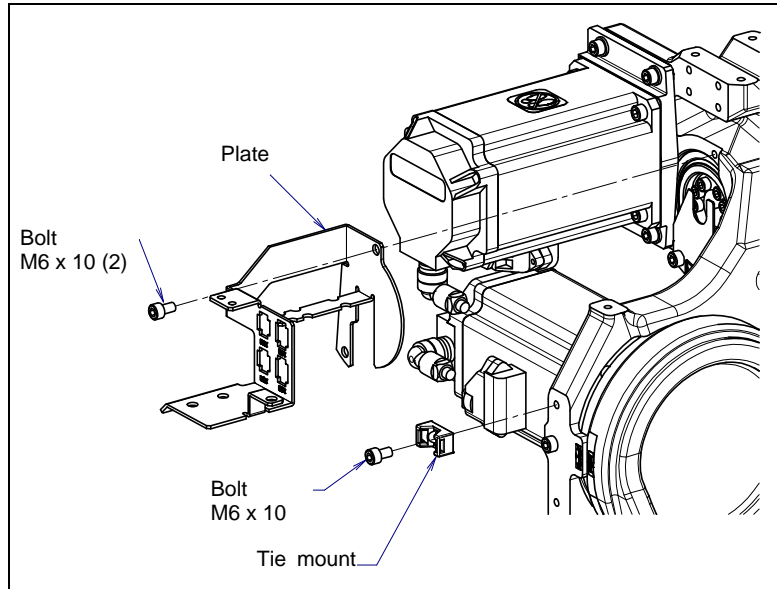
(c) Replacing the cable kit (J3 casing side)
